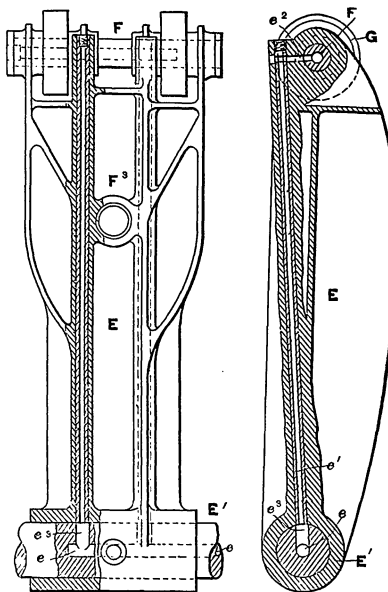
Sectional Views of Arm E of Fig. 4.
